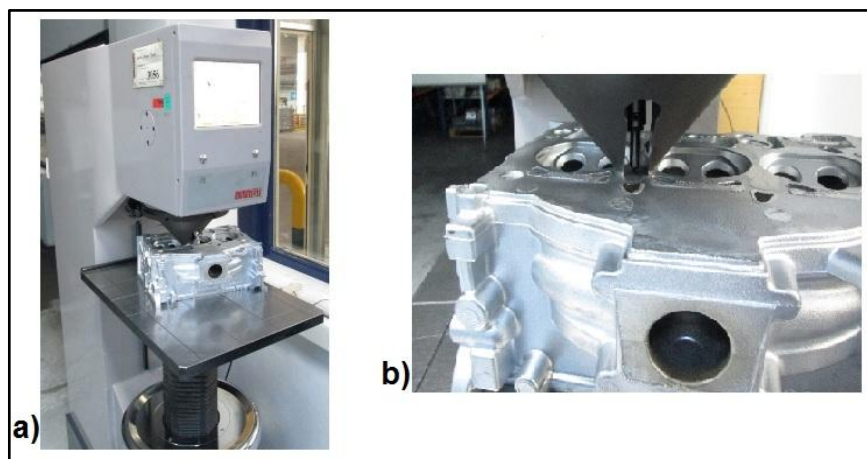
a) Emco-Test test machine, b) Hardness measurement of cylinder head
